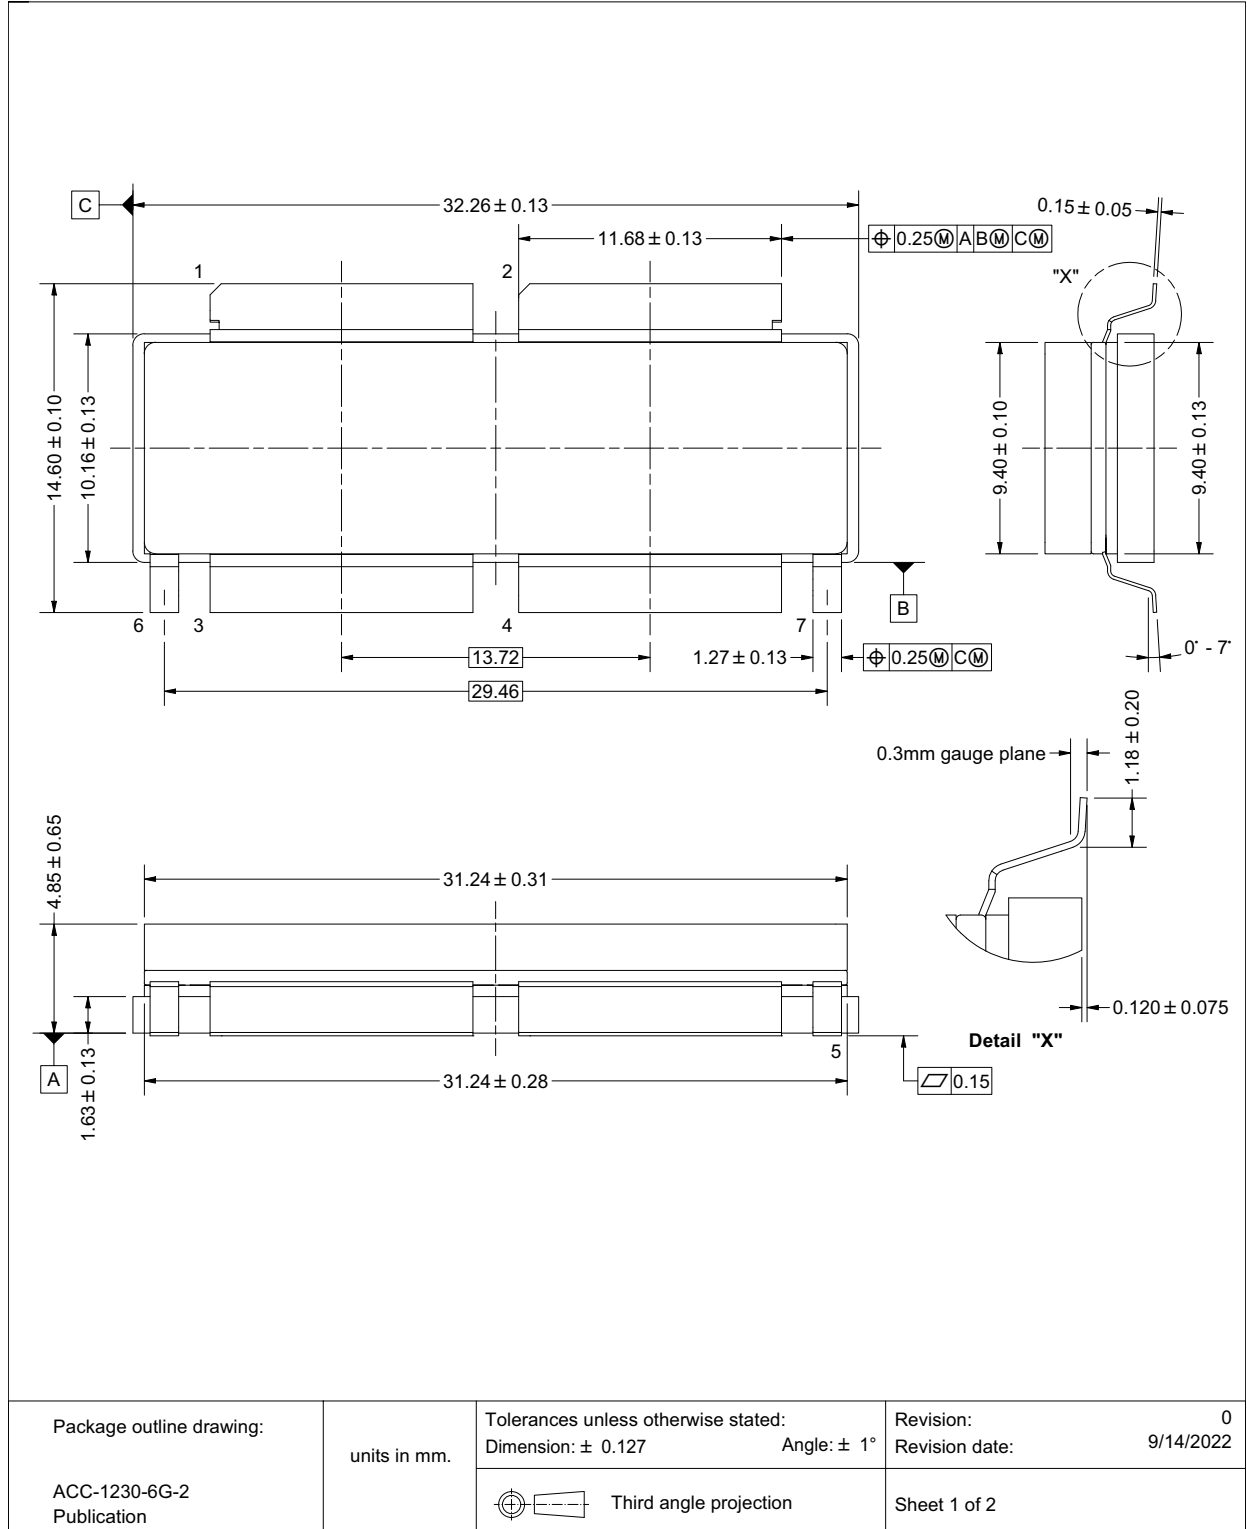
Package outline ACC-1230-6G-2 (sheet 1 of 2)
